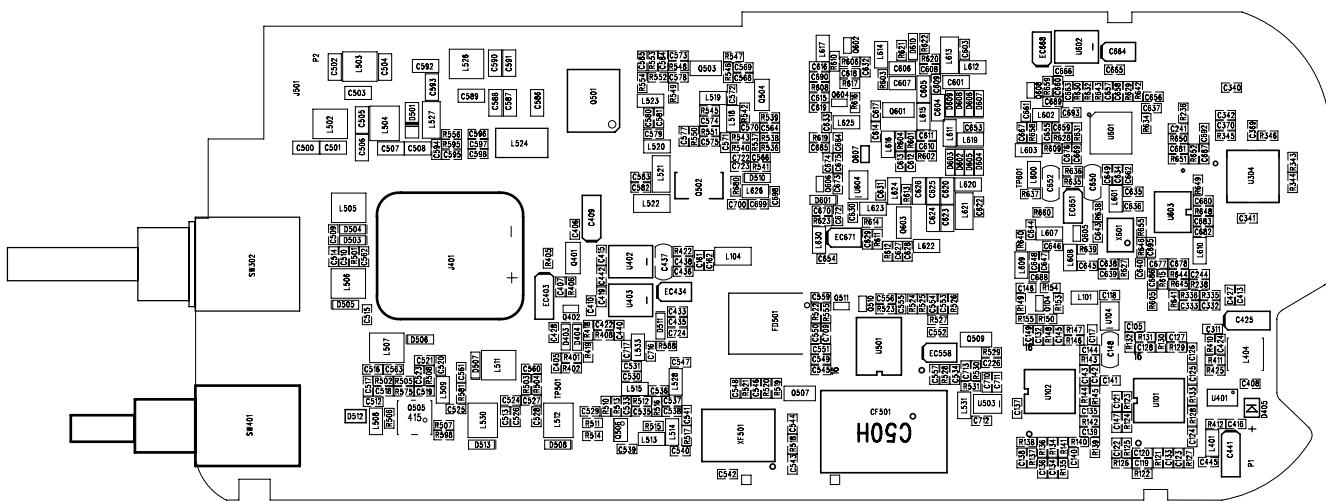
TP660 Main Board Bottom Side PCB View (400-470MHz)
